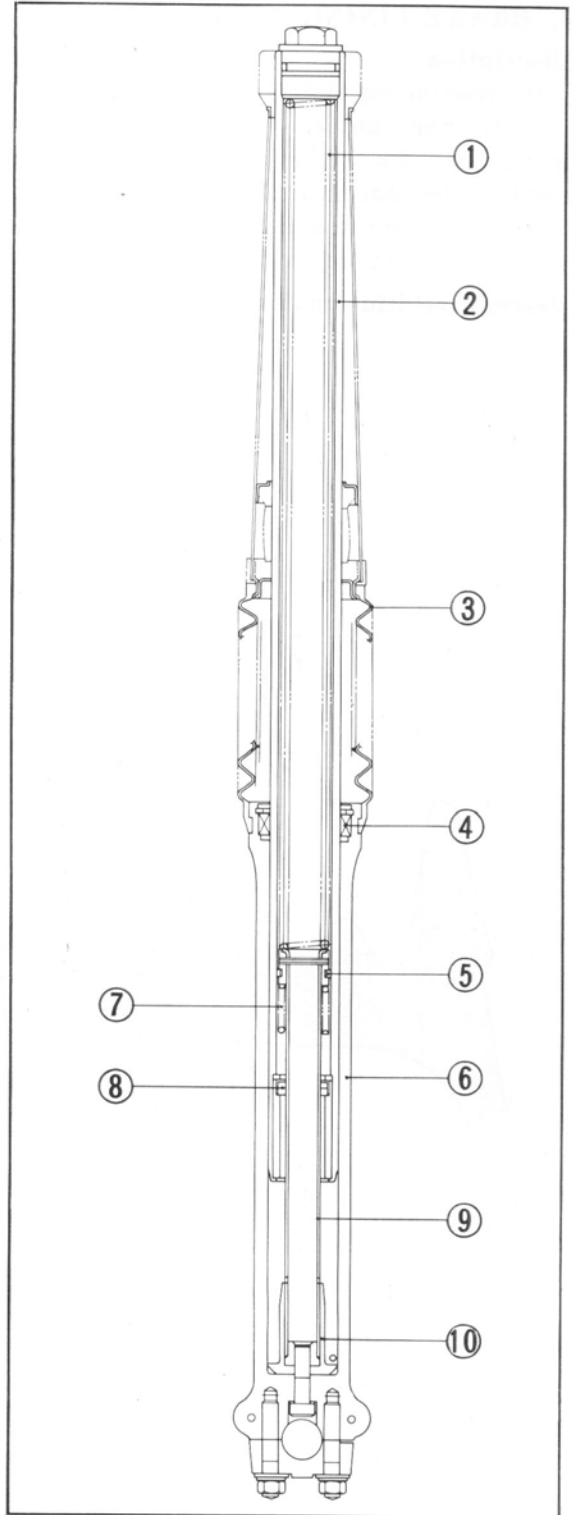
① Front spring ② Front fork pipe ③ Front fork dust seal ④ Oil seal ⑤ Piston ring ⑥ Front fork bottom leg ⑦ Front rebound spring ⑧ Free valve ⑨ Bottom pipe ⑩ Oil lock piece
